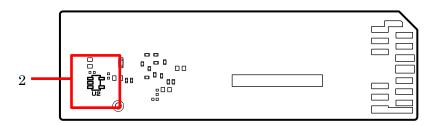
MMC+ Card Specification (Bottom View)
